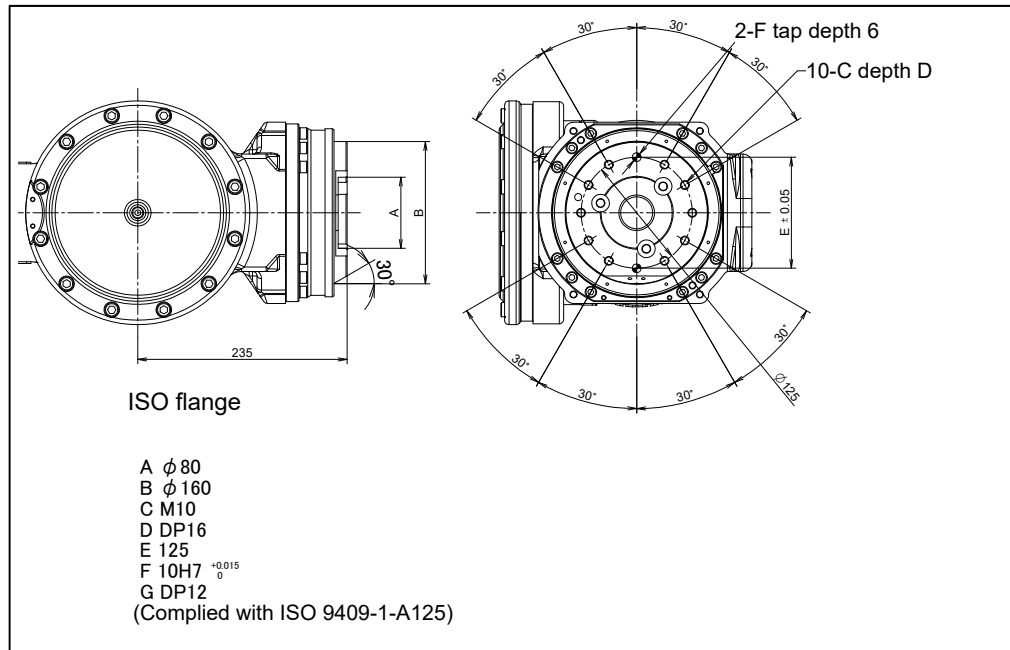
(h) End effector mounting face (ISO flange) (R-2000iB/210WE)
